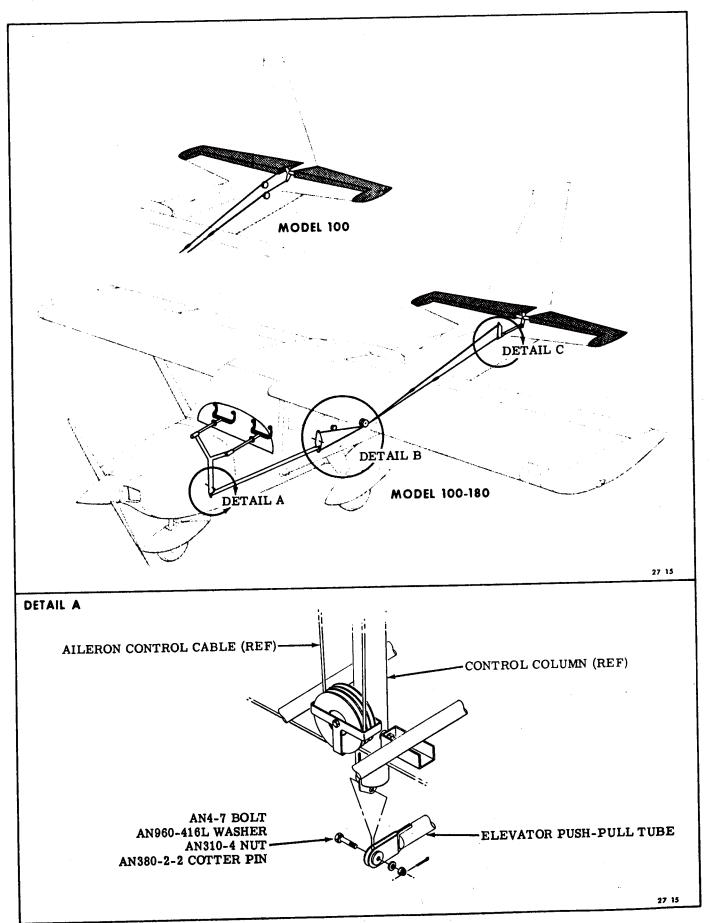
Elevator Control System (Sheet 1 of 2)
